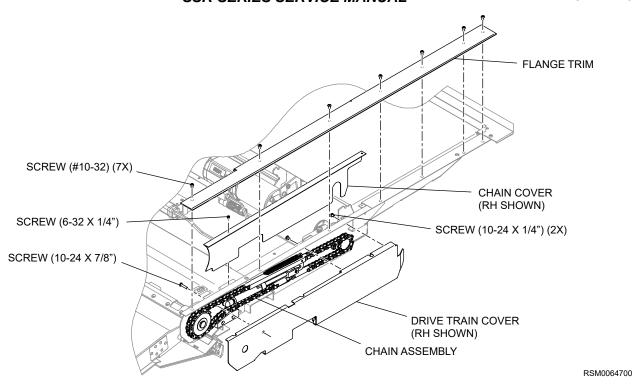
CHAIN COVER AND DRIVE TRAIN COVER
